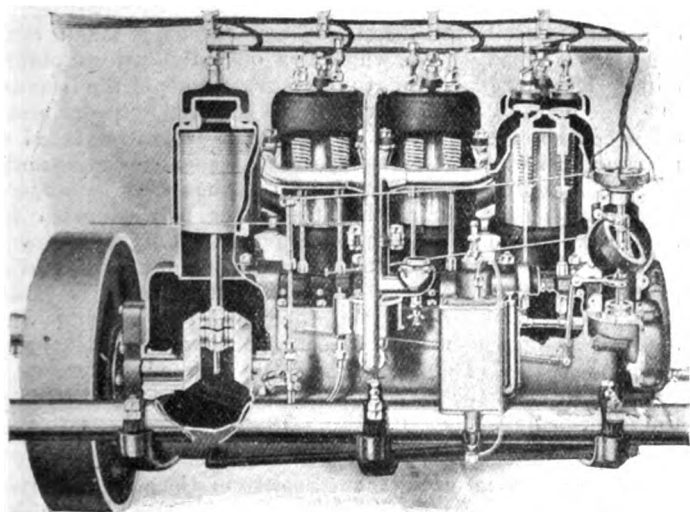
Part Sectional View of Cadillac Four-cylinder Motor.
